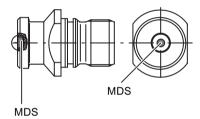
Installation example of MDS D421/D521/E623 in a stud bolt
